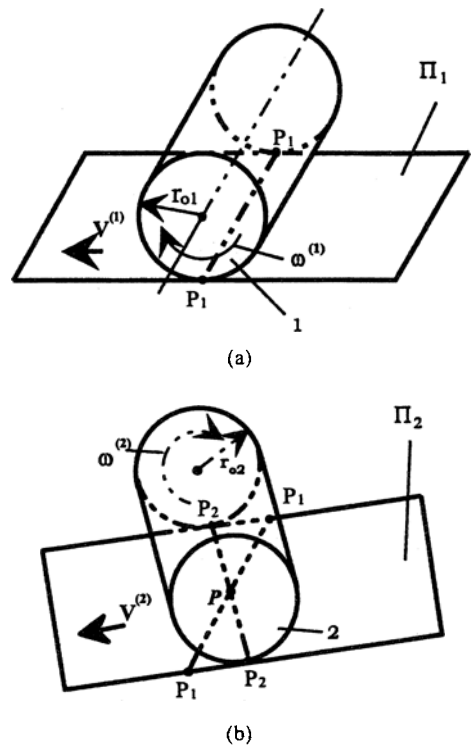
Schematic generation of conjugated tooth surfaces for helical gears with crossed axes
